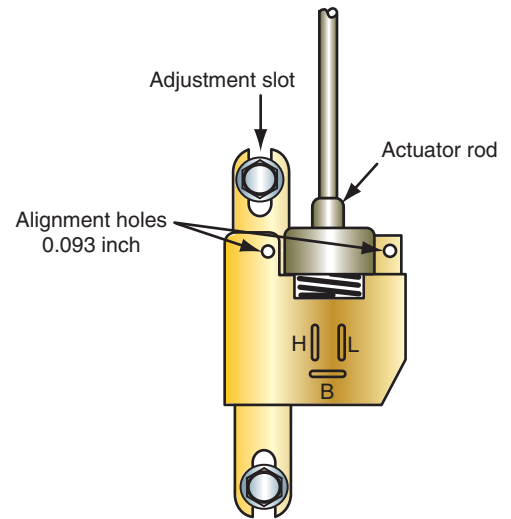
Insert a dowel into the alignment holes to adjust the dimmer switch.
